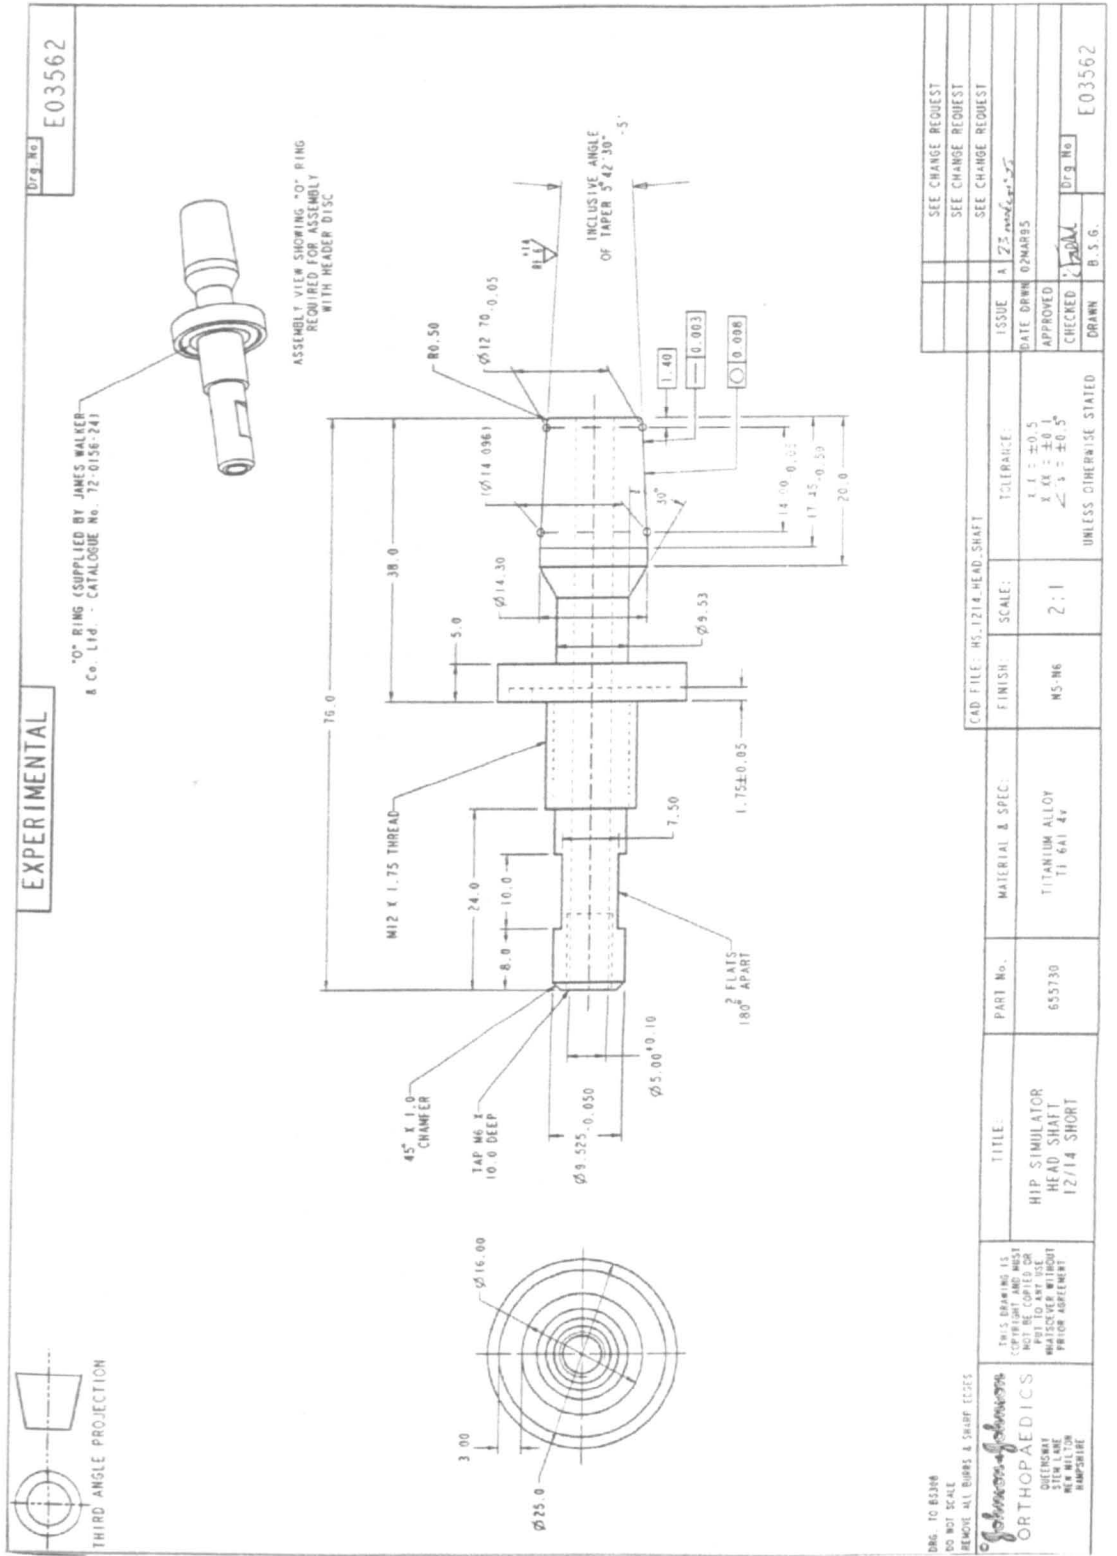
Hip Simulator Test Fixture Drawing (Rod)
